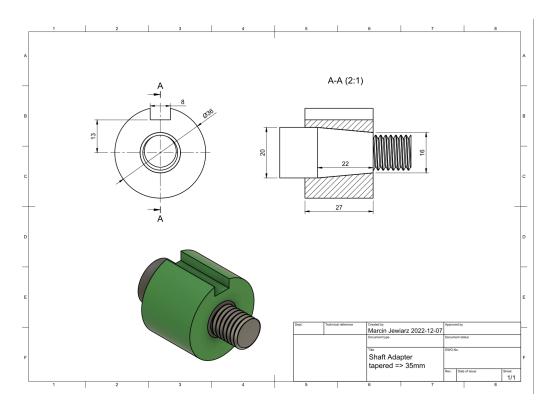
Pump shaft adapter from taper to 35mm connection
